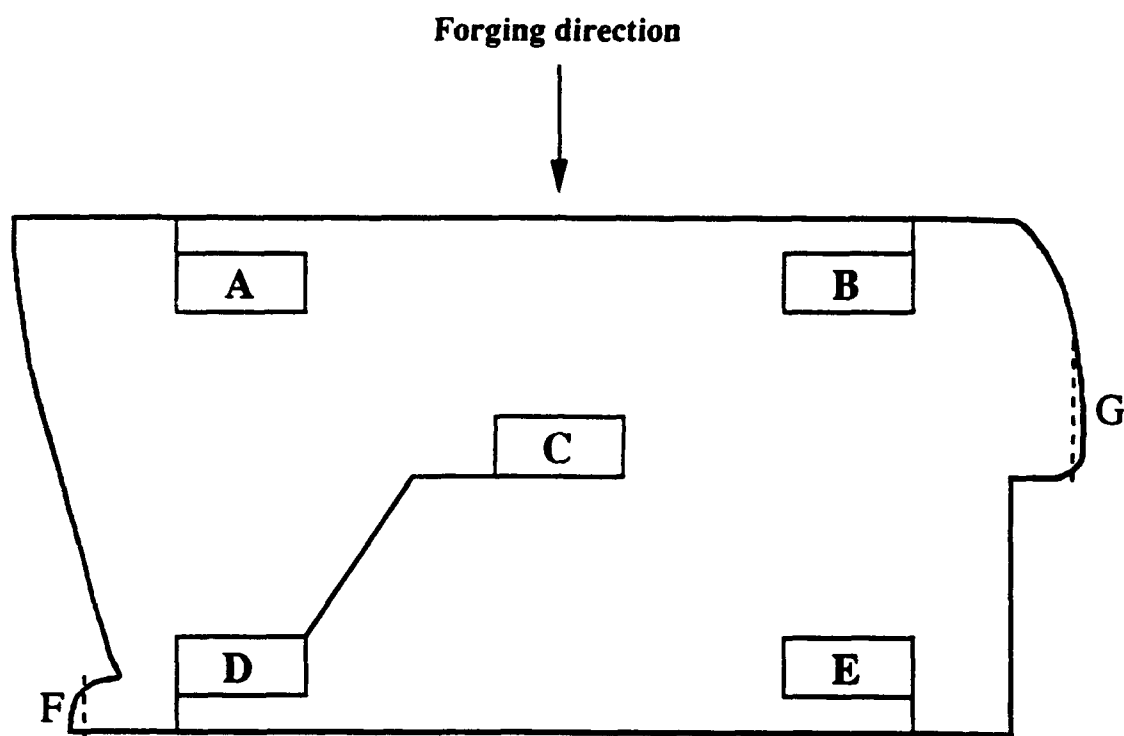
The location of the seven metallographic specimens electro-discharge machined from a vertical slice of a forged cylinder.
